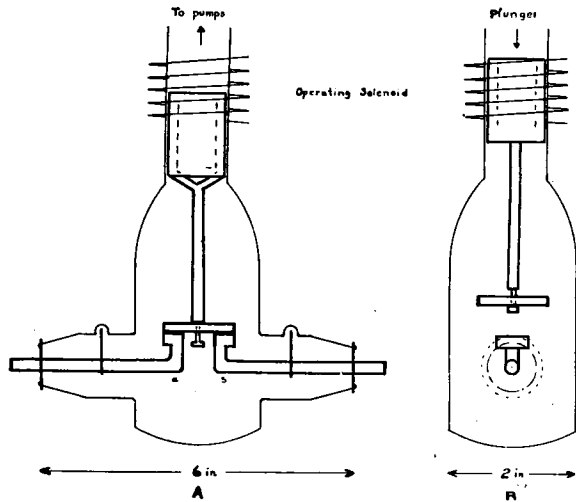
CROSS-SECTION VIEWS OF SWITCH NO. 1
